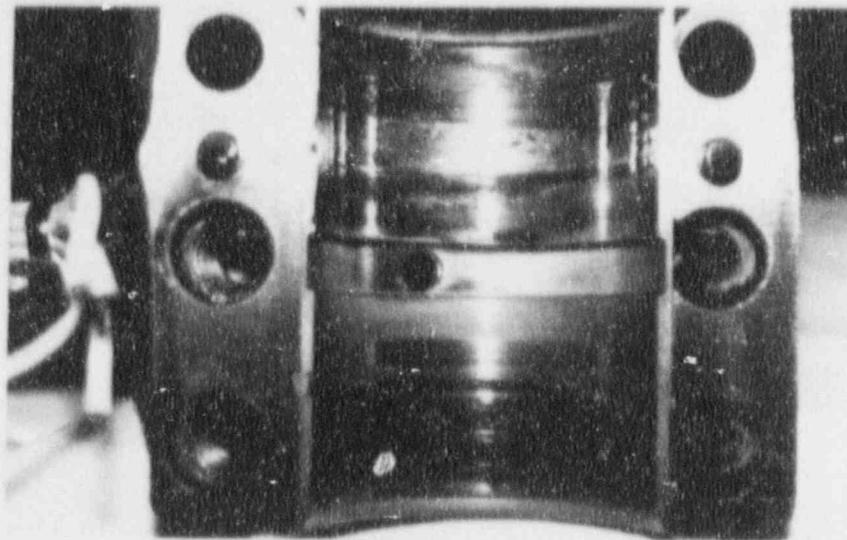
View of the lower half of the stubshaft support bracket bearing. Note, the damage to the top half of the bearing surface was similar to the bottom half of the bearing. The damage has been attributed to severe camshaft gear vibration after the stubshaft flange began to fail, and a loss of lubrication damage after the bracket detached from the end shell and the camshaft gear continue to rotate on the idler gear.
